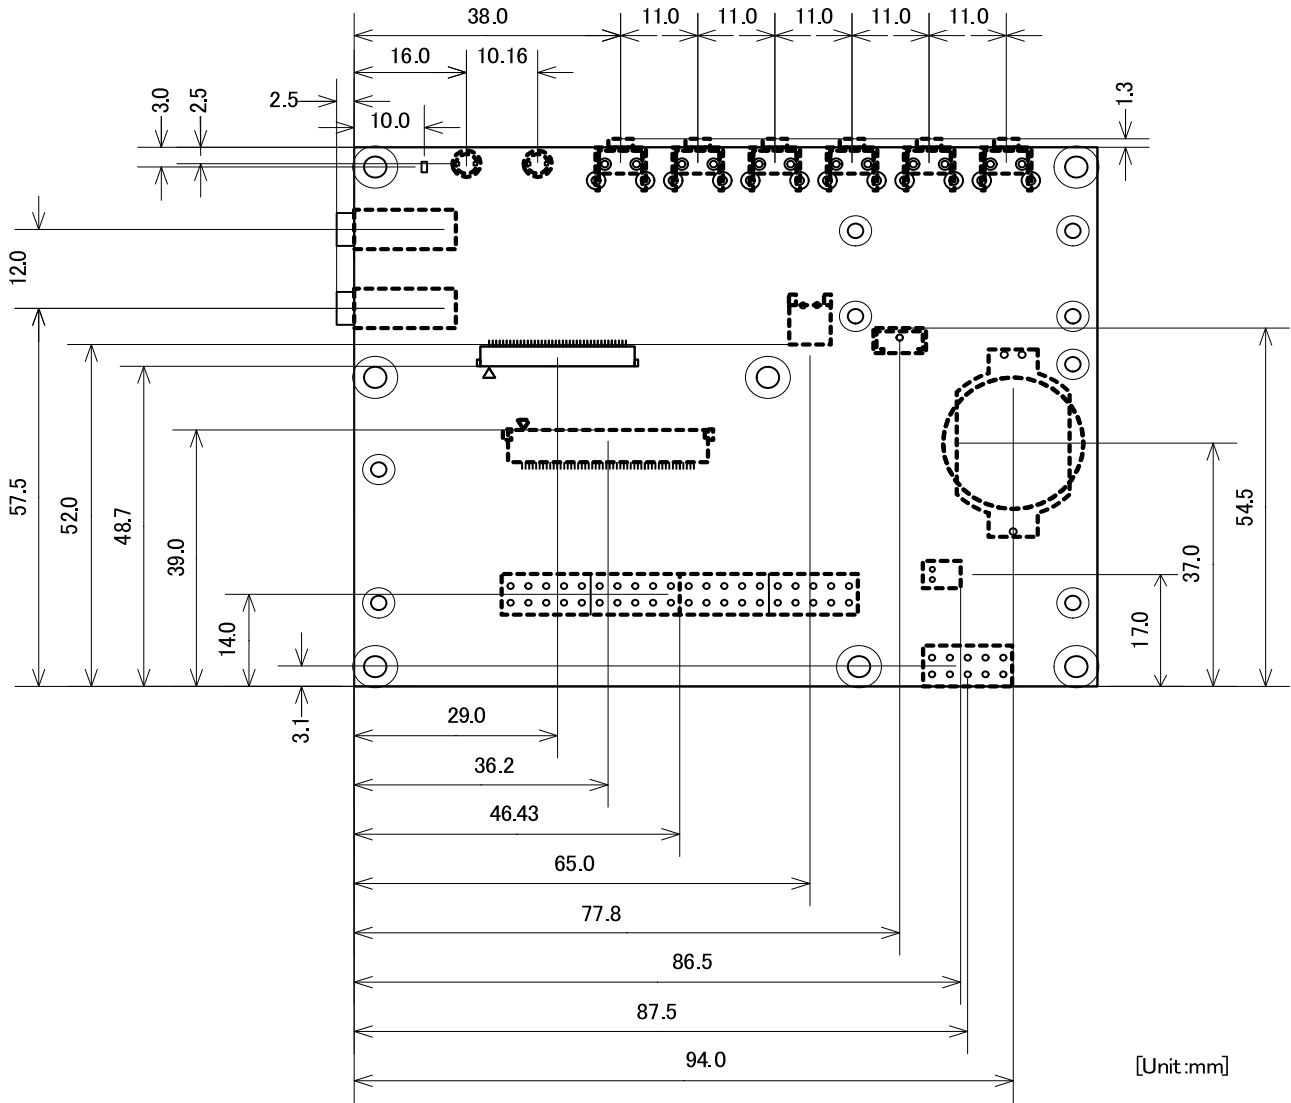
LCD Expansion Board (Product Revision B) Connector Locations
